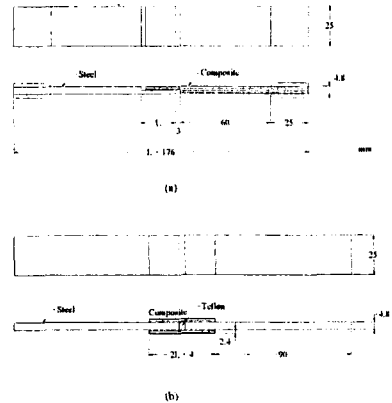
Shape and dimensions of the co-cured lap joint specimens. (a) Co-cured single lap joint specimen; (b) co-cured double lap joint specimen.
